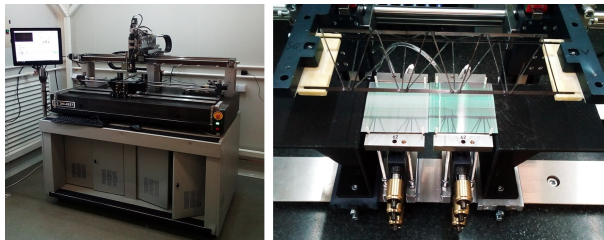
Photograph of the ladder assembly device installed at VB LHEP, JINR (l.h.s.); Photograph of the ladder mockup assembly process (r.h.s.).
